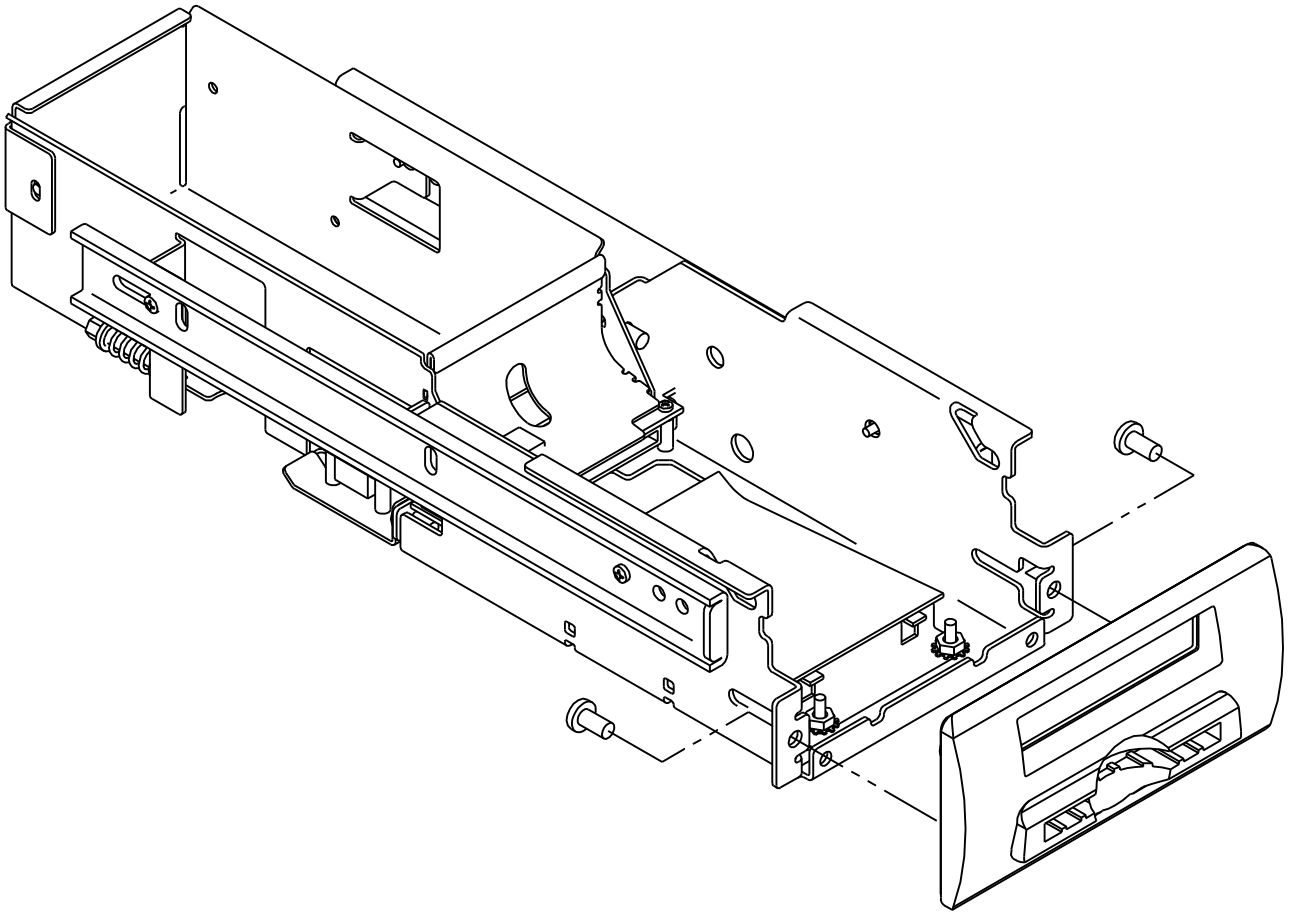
Removing the Bezel Assembly from the Main Chassis Assembly
